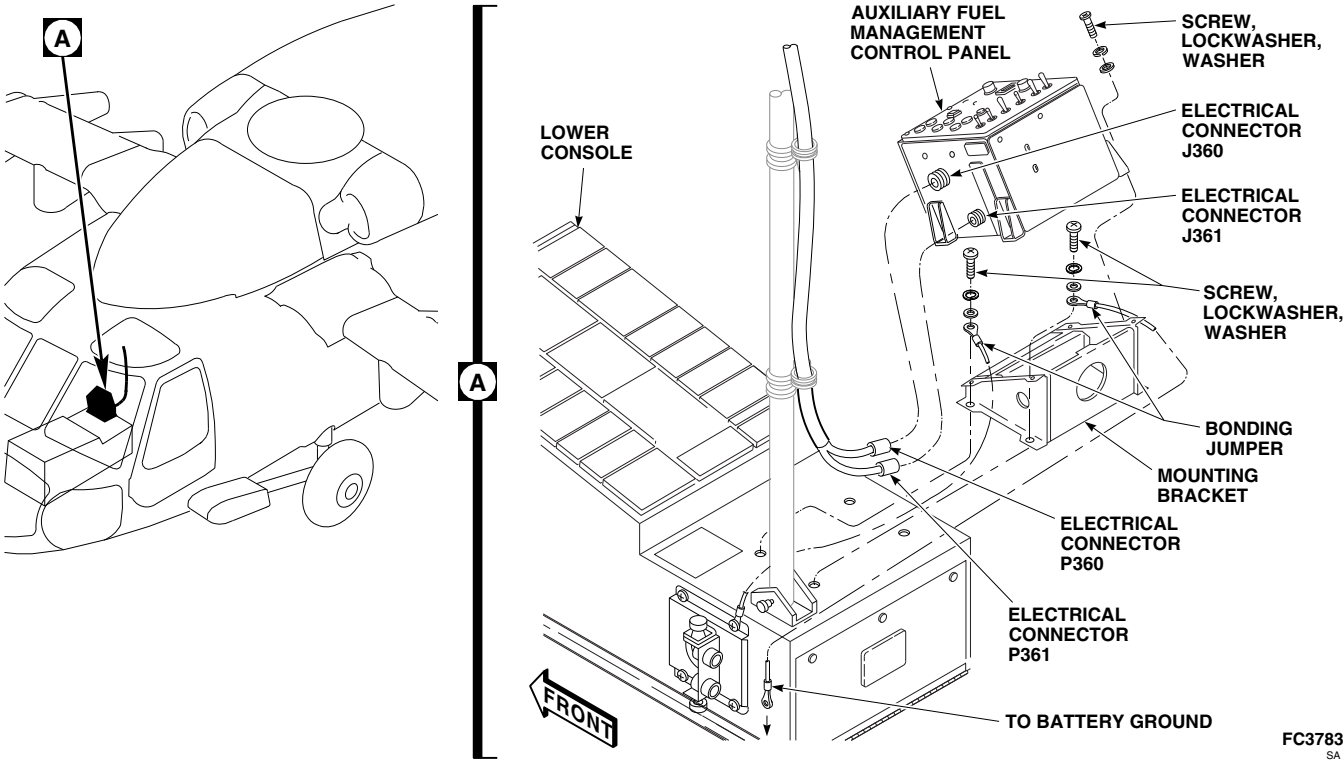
REMOVE AUXILIARY FUEL MANAGEMENT CONTROL PANEL
